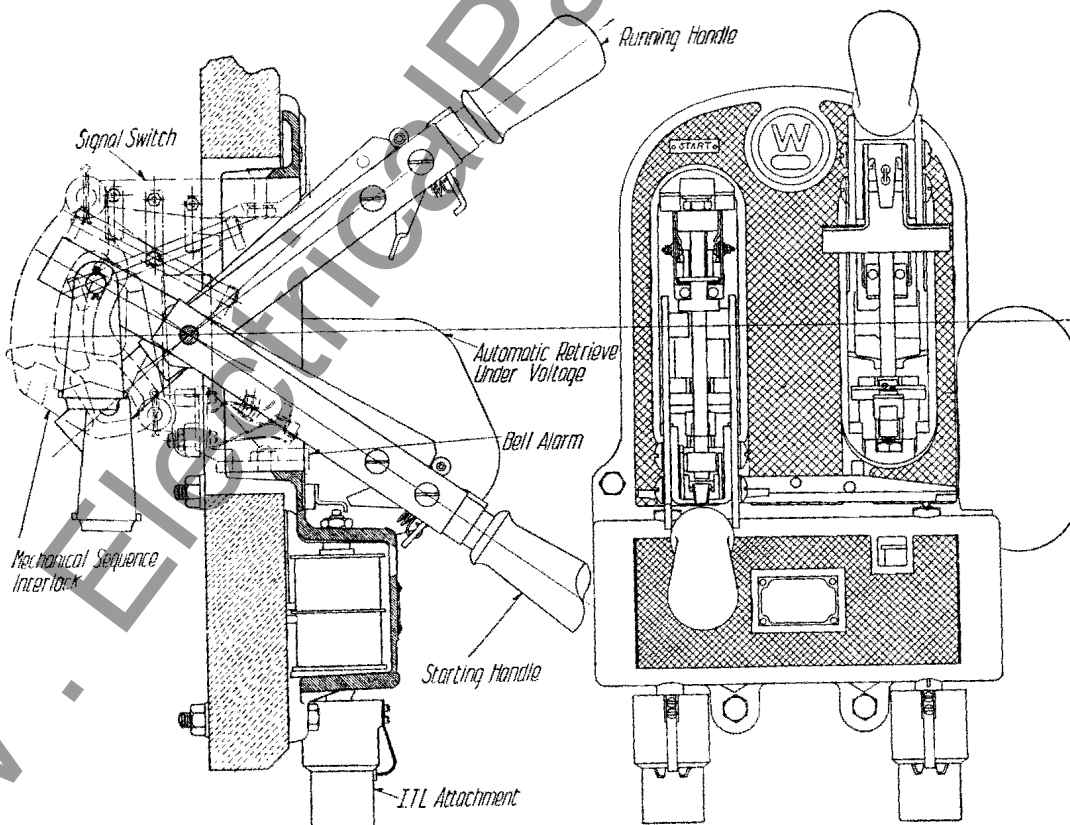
DOUBLE HANDLE COVERPLATE FOR MOTOR STARTING EQUIPMENT
